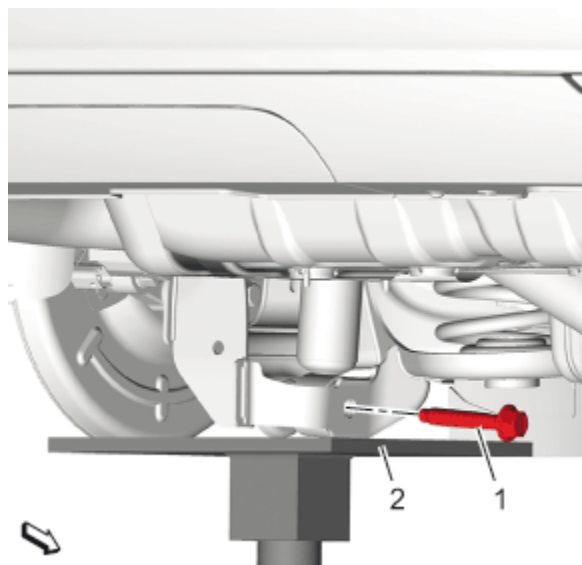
Rear Shock Absorber Bolt And Hydraulic Jack
